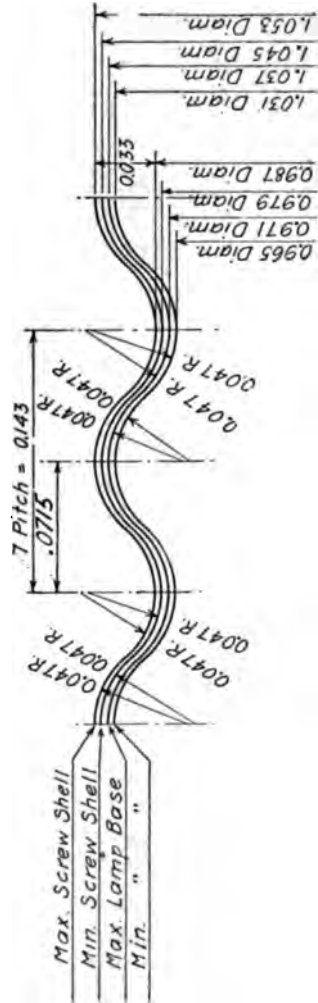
FORM AND DIMENSIONS OF THREADS FOR LAMP BASE AND SOCKET SCREW SHELLS, MEDIUM SIZE
